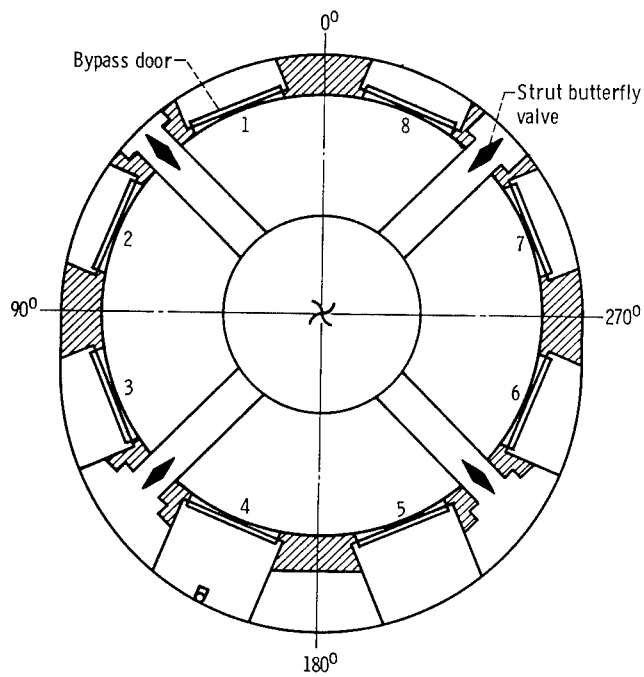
View of inlet diffuser looking downstream showing bypass doors and centerbody bleed flow struts.
